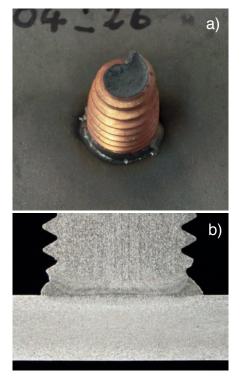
• View and weld penetration shape of a SRM welding connection with M12 stud made of S235 material (stability class 5.8); the tensile test resulted in a fracture position in the stud after contraction in the thread – a) complete bead formation, fracture position in the stud, breaking force 50.5 kN, b) even, thin melting zone, little weld penetration depth in the sheet, no weld defects visible.
